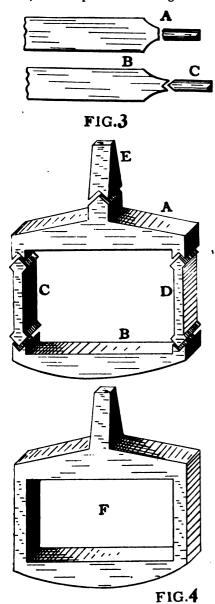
8HOWS METHOD OF WELDING BRAKE-BRAM STUBS. Fig. 4.—METHOD OF MAKING A VALVE YOKE.
